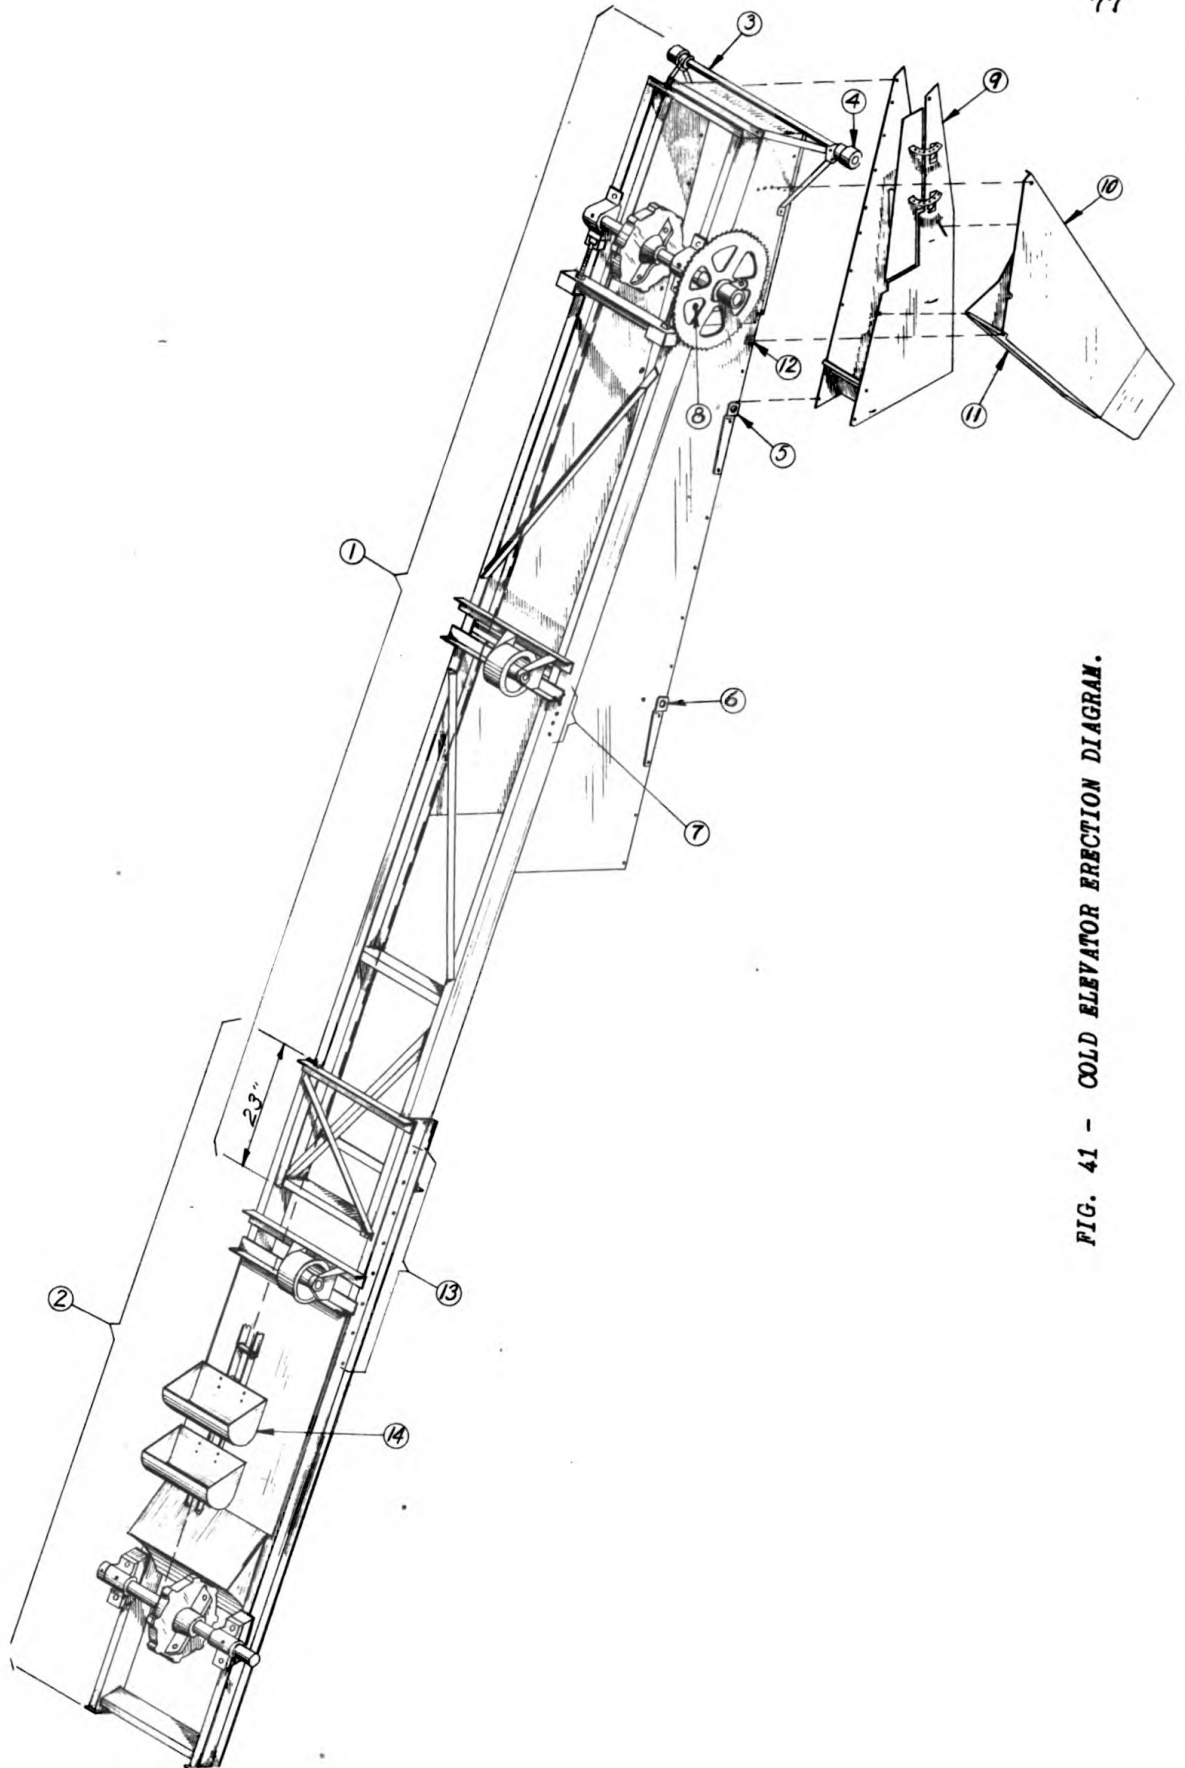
COLD ELEVATOR ERECTION DIAGRAM.
